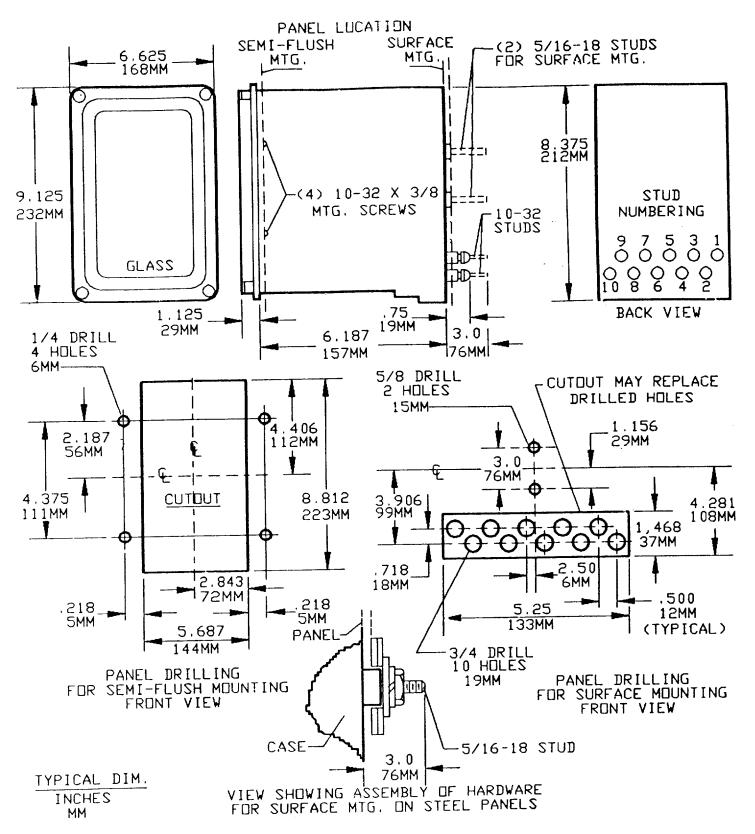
(K-6209271-8) Outline and Panel Drilling Dimensions for Size S1 Case
